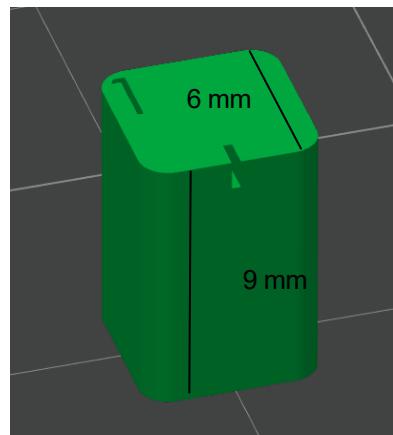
The picture shows the CAD design for the squared coupons. The picture shows they have the shape of a quadrangular prism. The dimensions are 6 mm per side x 10mm (height) considering the bonding recipe. The number of each of the cylinders was printed on the top of each to allow easy identification of the sample number. The small ridge was including to facilitate cutting.
